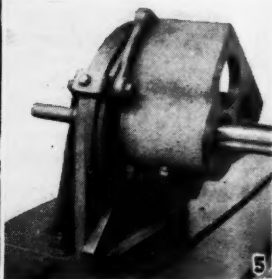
Boring the barrel for the fork. The boring tool is followed with an inserted-tooth, adjustable reamer. Fig. 3—Milling sides and tops of hub caps. The 24 pieces are finished in 35 minutes. Fig. 4—Boring three holes for ball bearings in a reverse gear case. Fig. 5—By revolving the work-plate, each of the three holes in succession is brought into line with the boring bar. Exact location is obtained by means of a plug that fits into a steel bushing.
